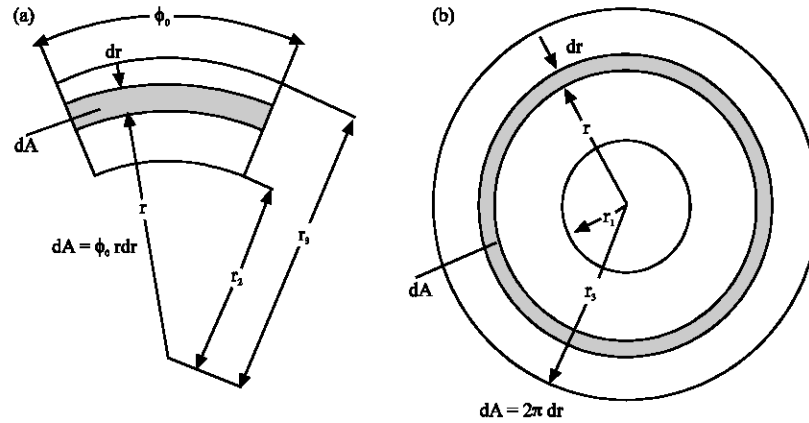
Contact surface element of two components (a) the pad and (b) the disk
